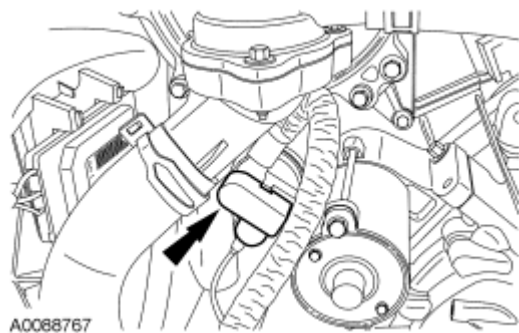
Identifying Starter Motor Electrical Connector Cover
